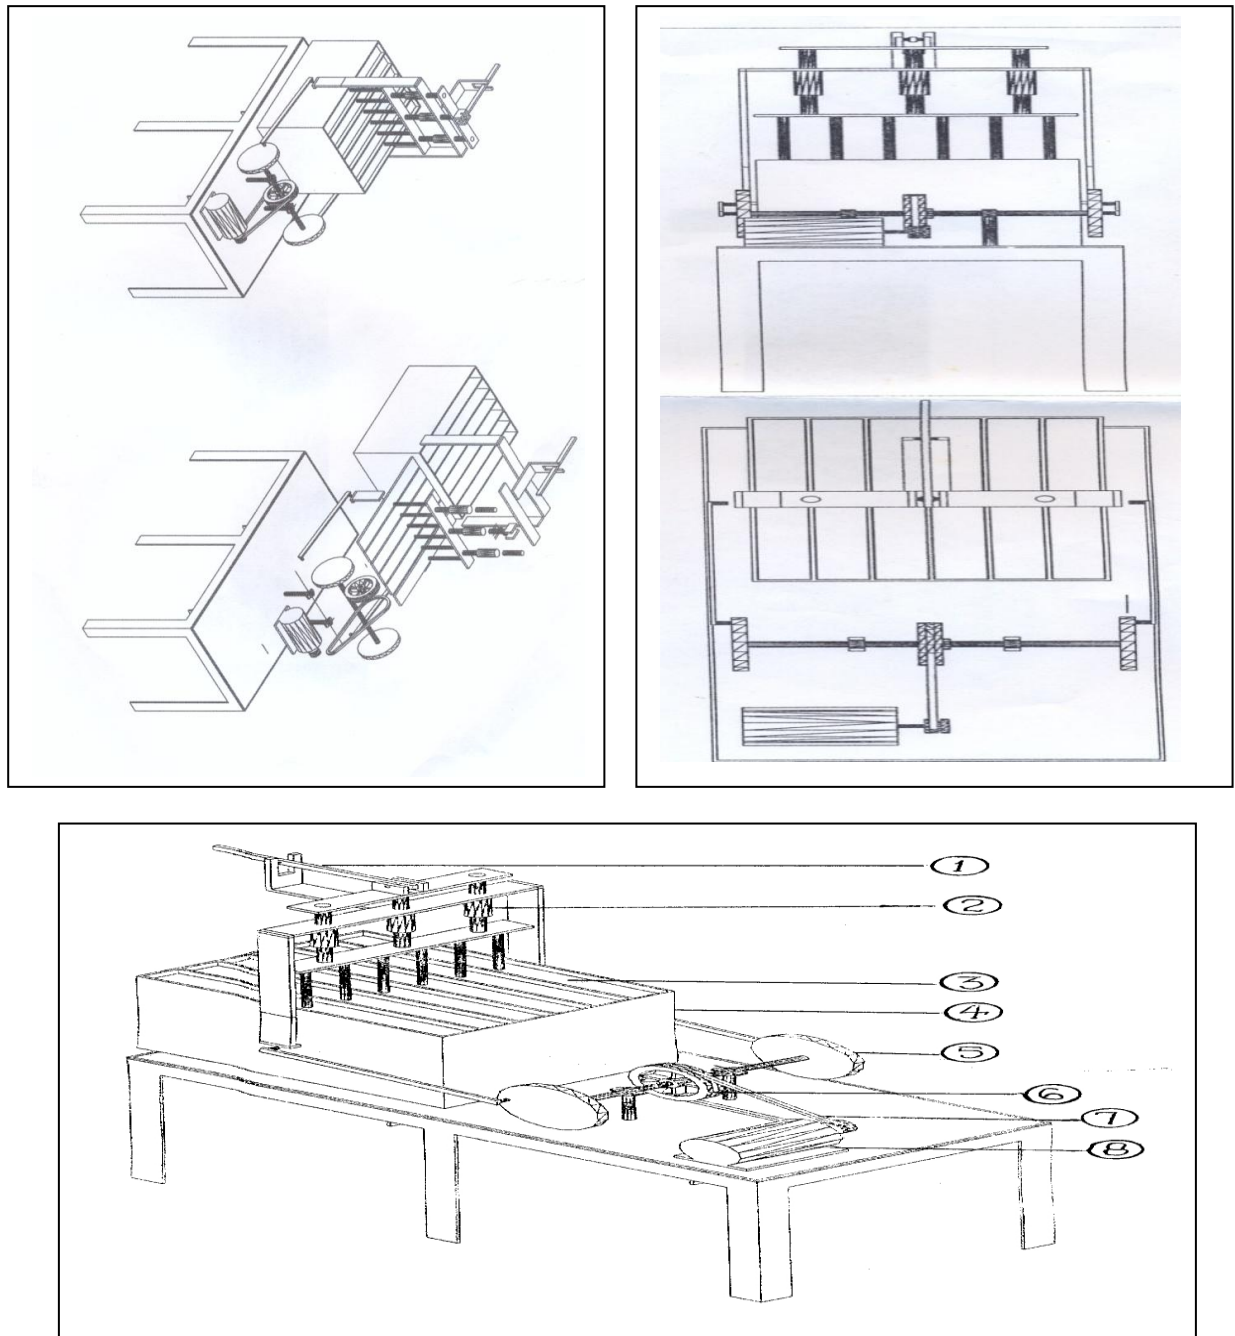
Isometric, exploded and front views of an Improved Plantain Slicer.
